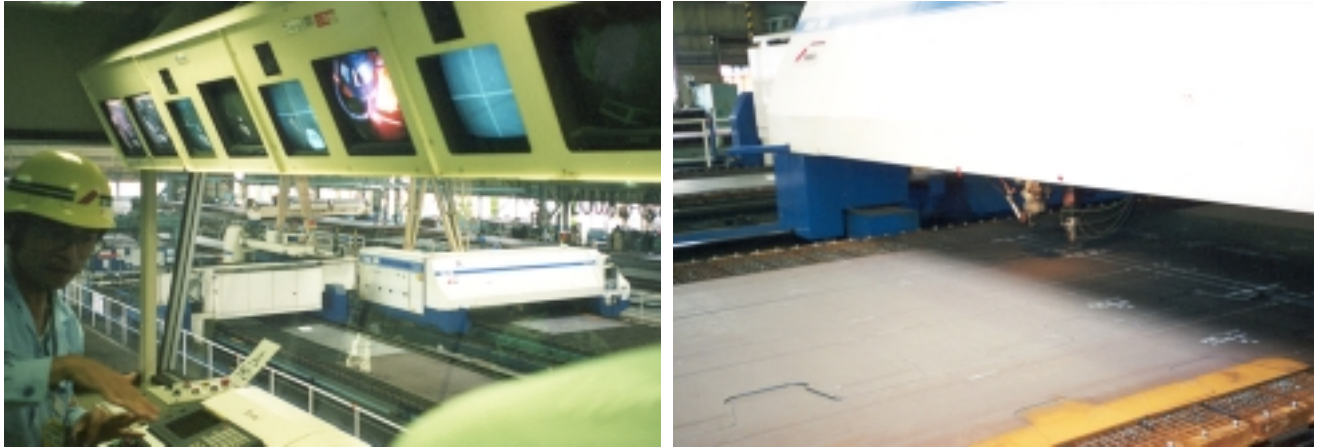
Parallel NC 3-kW CO₂ gas laser cutting lines at Tsu Works: one for cutting large members, one for cutting small members.
